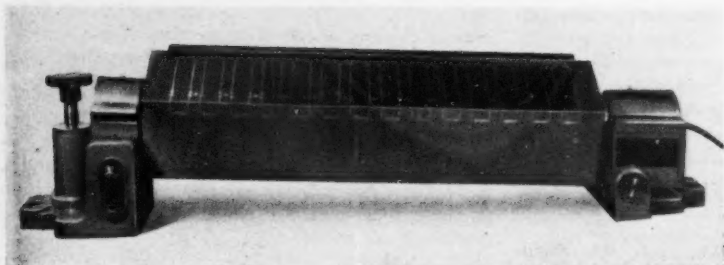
Windley Swivelling and Tilting Magnetic Chuck for Broach Grinding
